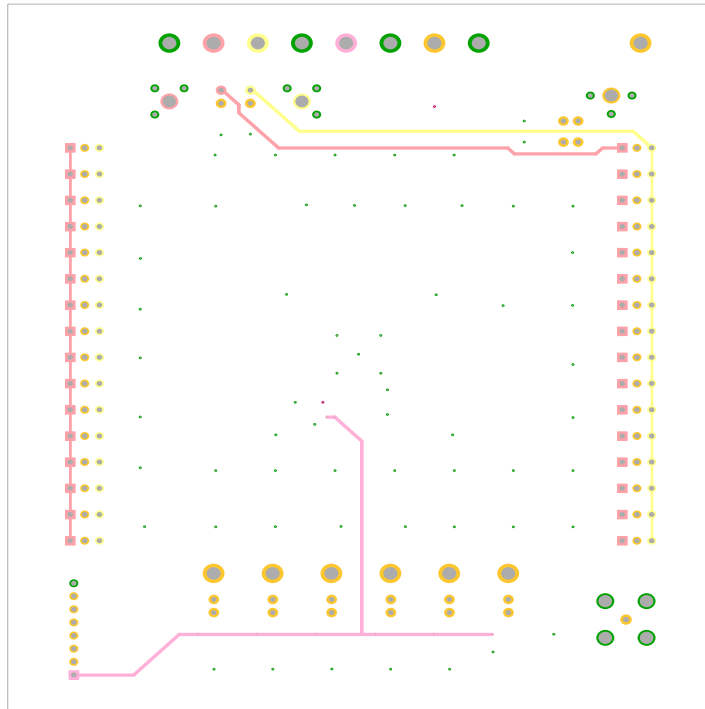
PCB – BOTTOM LAYER (TOP VIEW)
